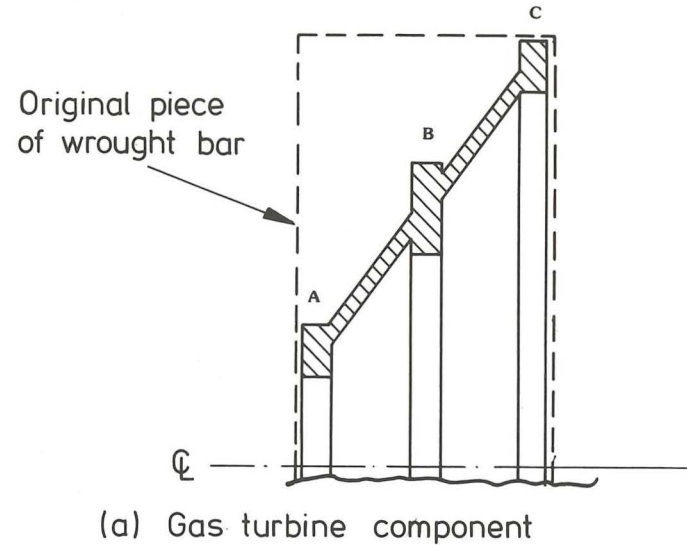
Typical advanced engineering components which have to be cut out of the solid
